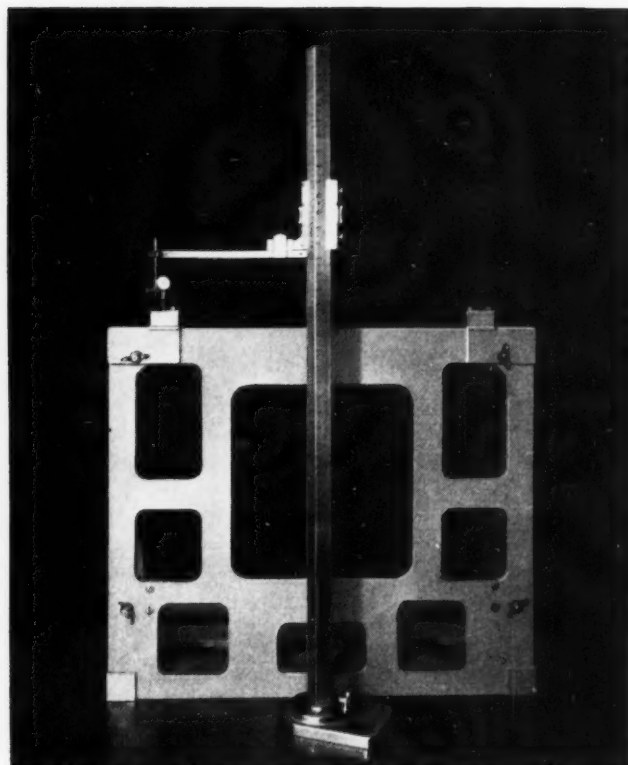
A Tool-room Application of the Chesterman Height Gage—Used with a Dial Indicator to Check Dimensions of a Machine Side-frame
